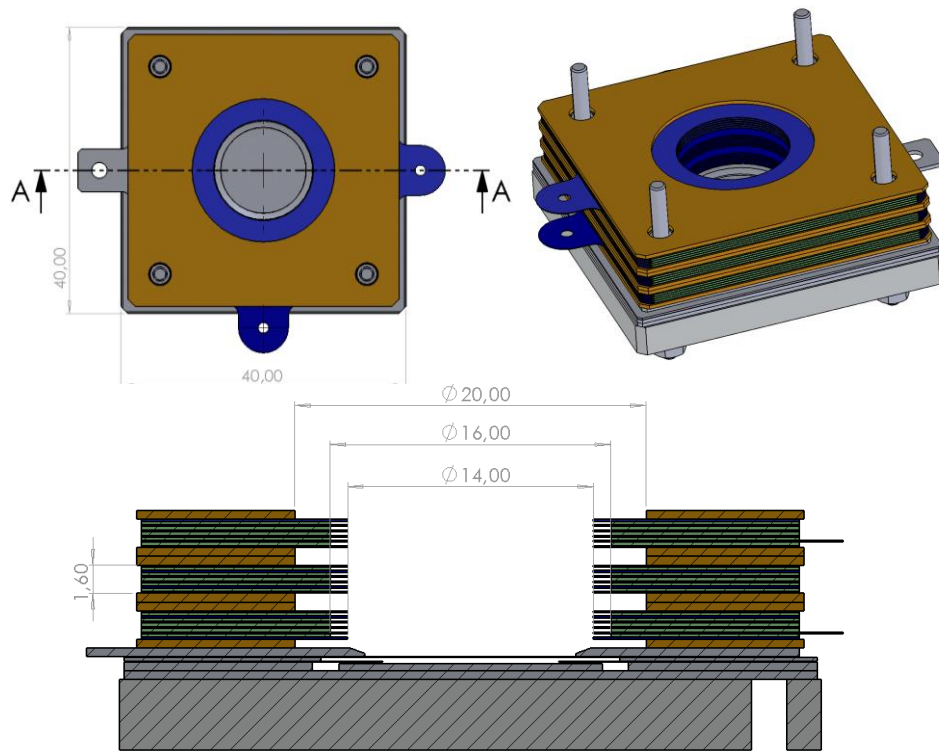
Top left panel is a top view of the electron lens mechanical assembly. Right panel is a 3D view of the assembly and the bottom panel is the longitudinal A-A cut
